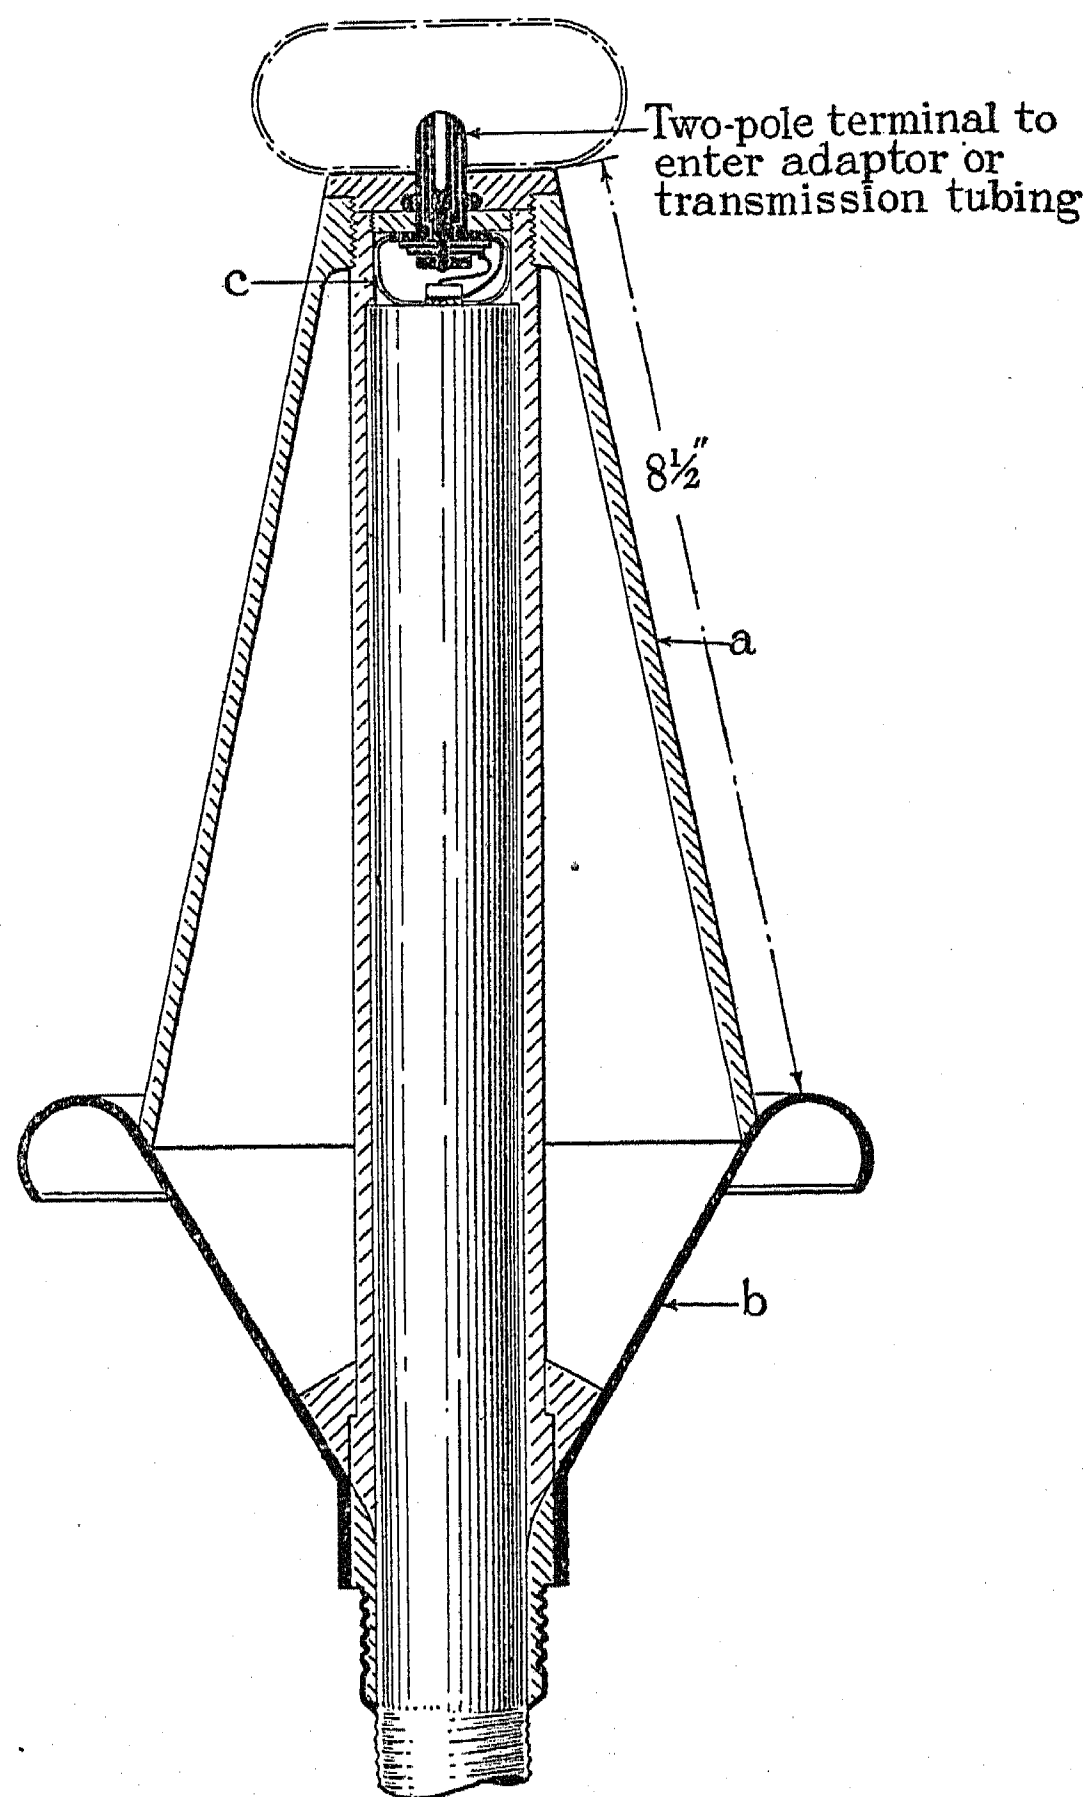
Method of making-off rubber-insulated high-voltage cable. Detachable cable end.
